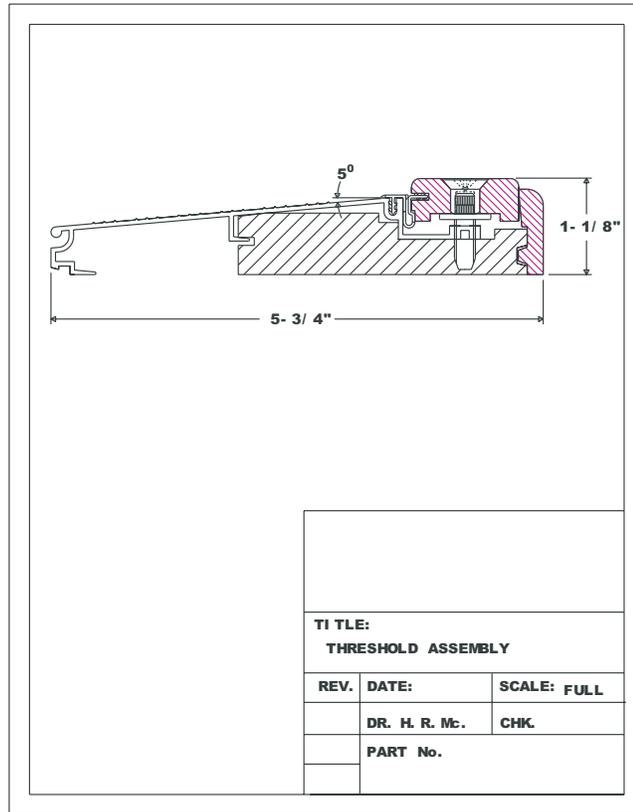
6-Panel Sil.dwg (\* PATENTED DRAWING)
